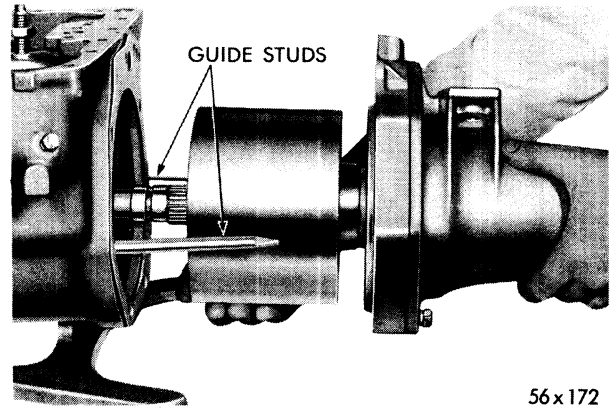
Removing Power Train Assembly as a Unit to Replace Direct Clutch Retainer Thrust Washer
